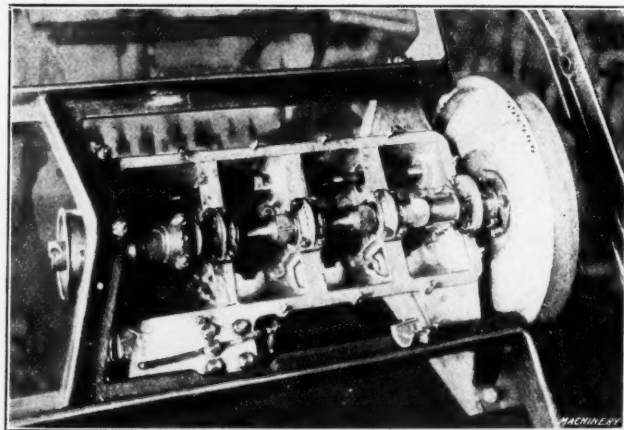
Rotating Trunnion Stand used in Assembling Engine Parts
